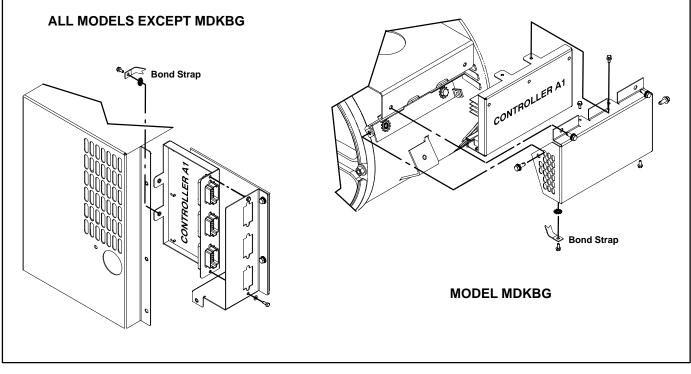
CONTROLLER A1 AND ITS MOUNTING
